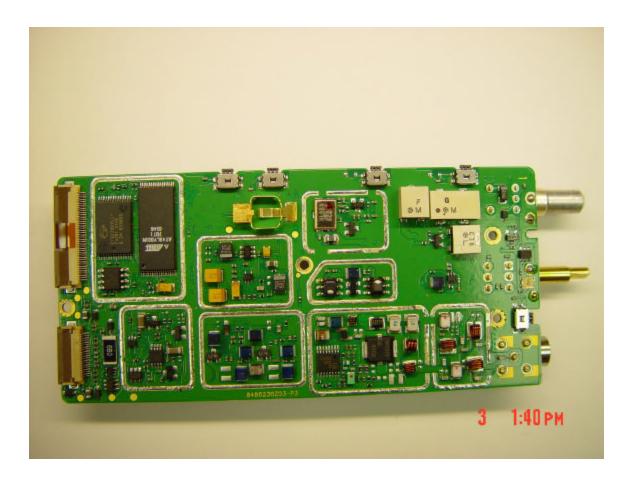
View of Circuit Board As Shown in Exhibit 9 Sheet 1 of 2 With All Shields Removed
